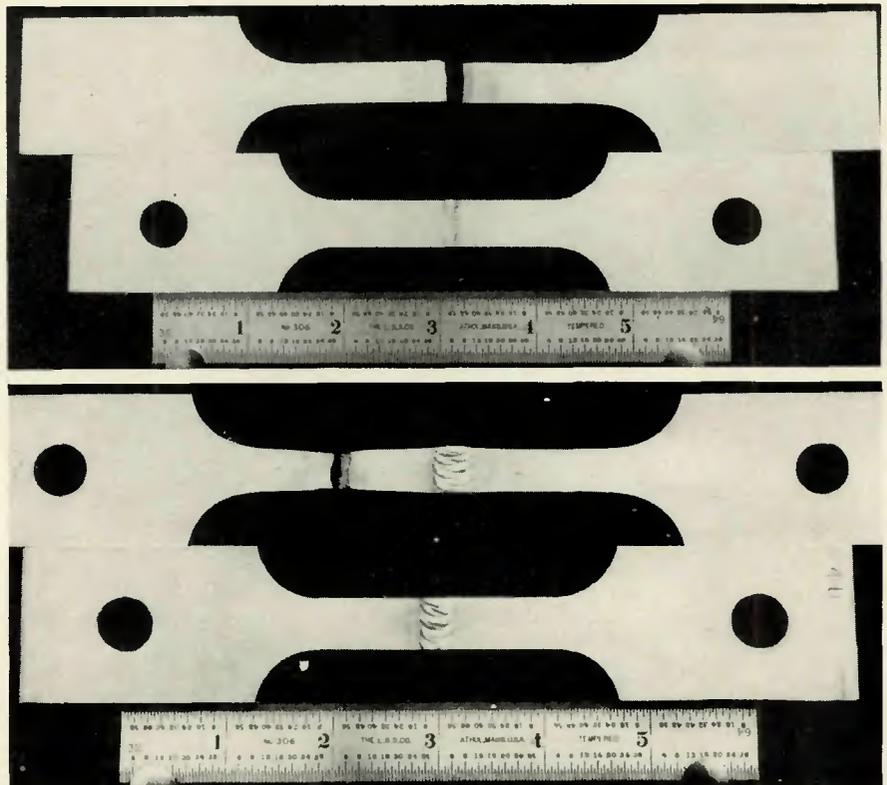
Comparison of as-welded Inconel 718 tensile coupons. Considerable elongation is shown in both the 0.070 in. (1.78 mm) thick (top), and the 0.187 in. (4.75 mm) thick (bottom) specimens
